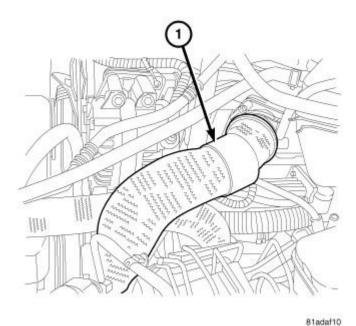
Charge Air Cooler Outlet Hose Courtesy of CHRYSLER LLC
